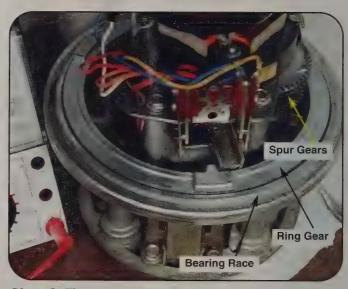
The spur gears, ring gear, and bearing race (see step 11).
